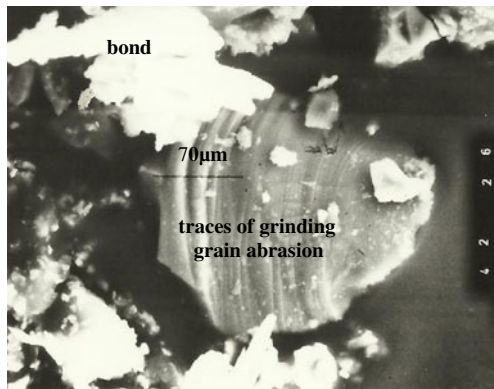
A view of the machined surface, with a sticking chip removed from the active grinding wheel's surface
